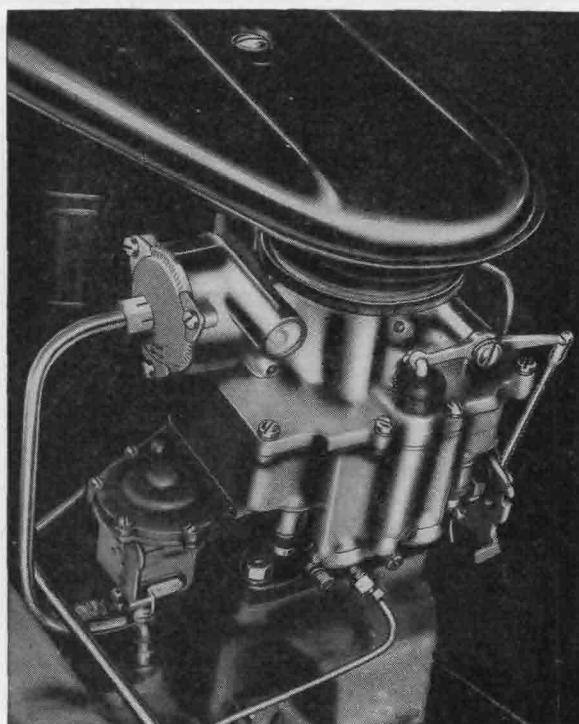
Stromberg choke control mounted on carburetor. This is the exterior view of the choke control shown in previous illustration. (*Buick Motor Division of General Motors Corporation*)
